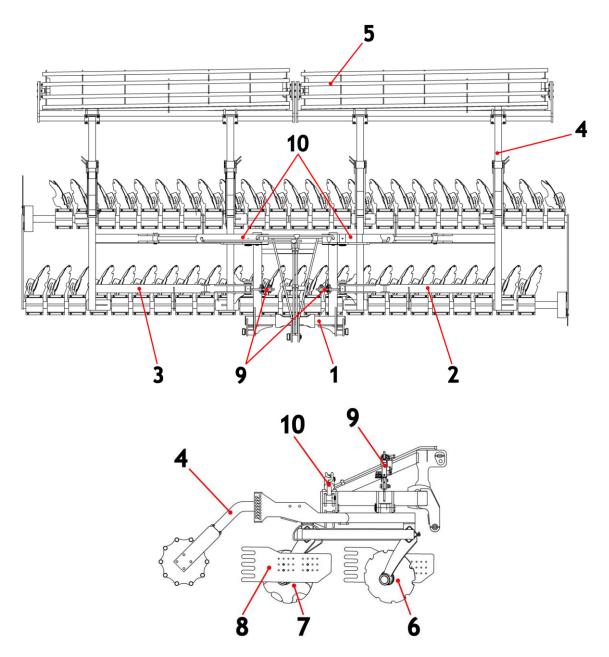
Construction of the disc harrow GAL-C H with tubular roller (hydraulically folded) (1-centre frame with drawbar, 2 - left frame, 3 - right frame, 4 - arms, 5 - tubular rollers, 6 - front disc row, 7 - rear disc row, 8 - side screen, 9 - automatic wing lock, 10 - actuators)
